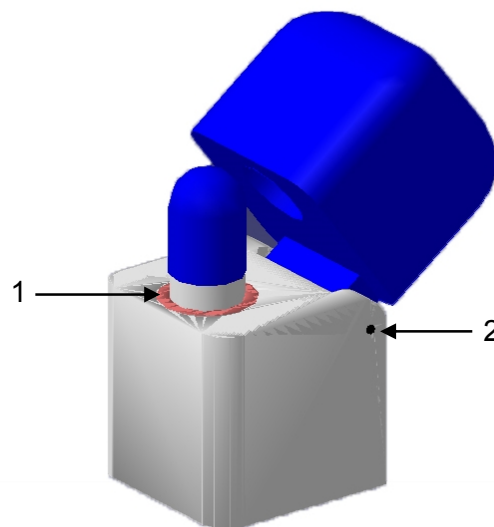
Concept 2, Version 1 design; (1) rubber holder; (2) revolute joint
